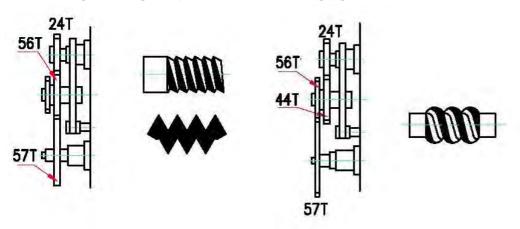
Position of the change gears for metric, inch threads and for module and diametral pitch
